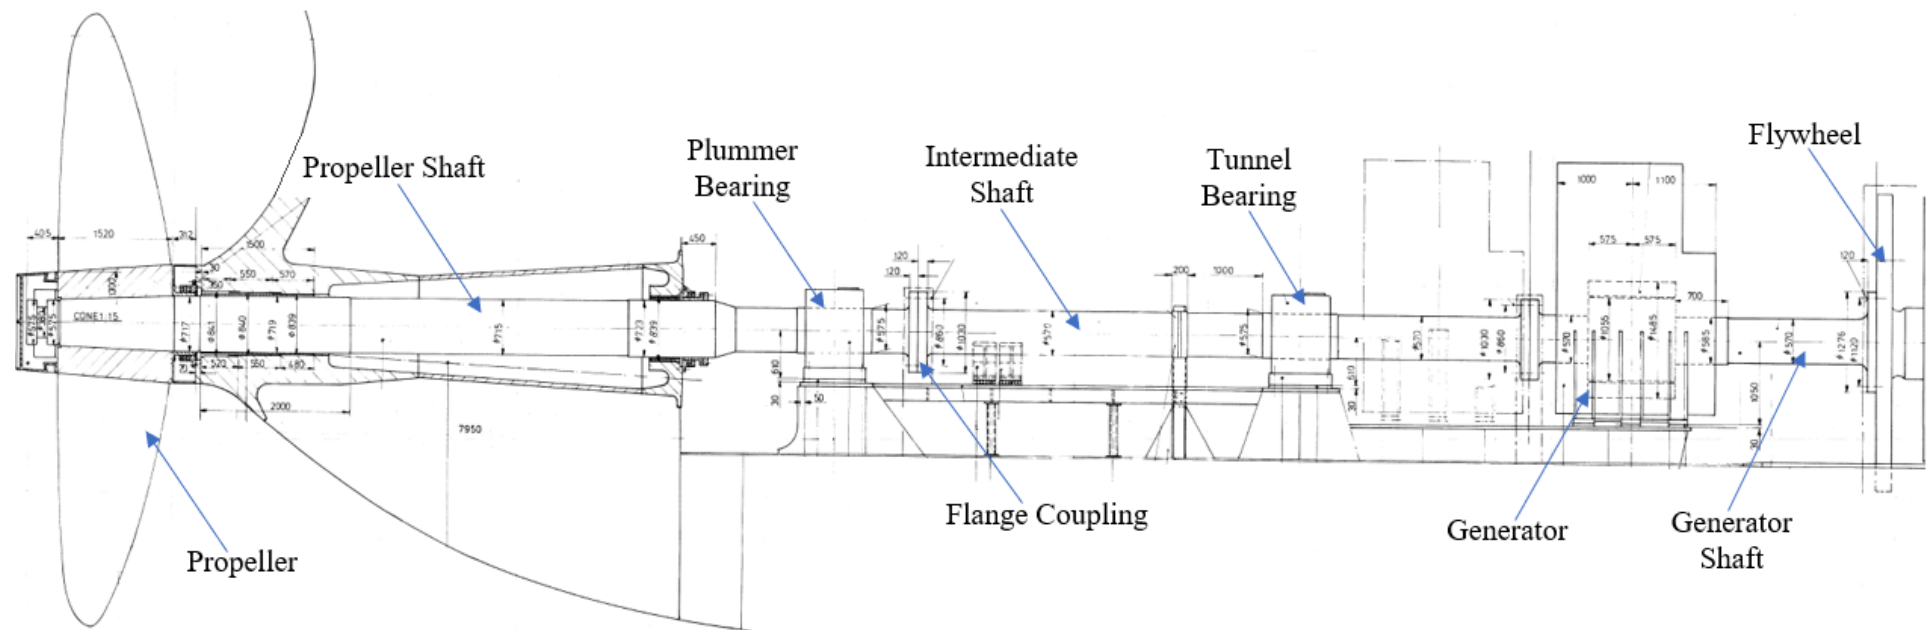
Shafting Arrangement of the Container Vessel (Layout from Flywheel upto Propeller)
